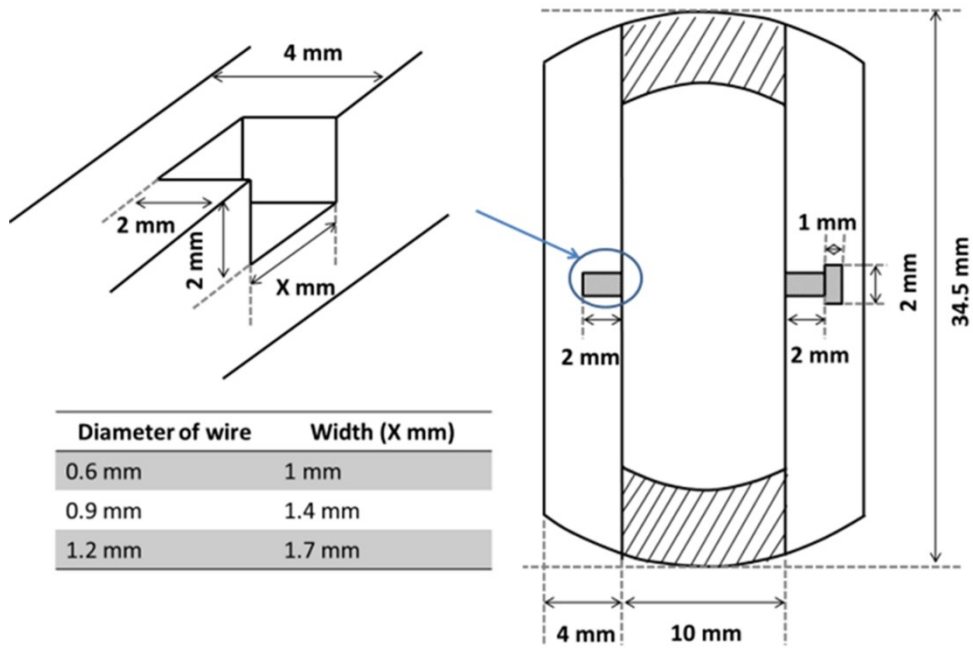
Schematic illustration of a wire holder for the suspended culture, which was fabricated from acrylic resin with a laser processing machine.
